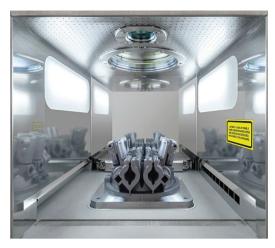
Metal parts production with 3D printer ("Metal Milestones in 3D Printing," 2020)
